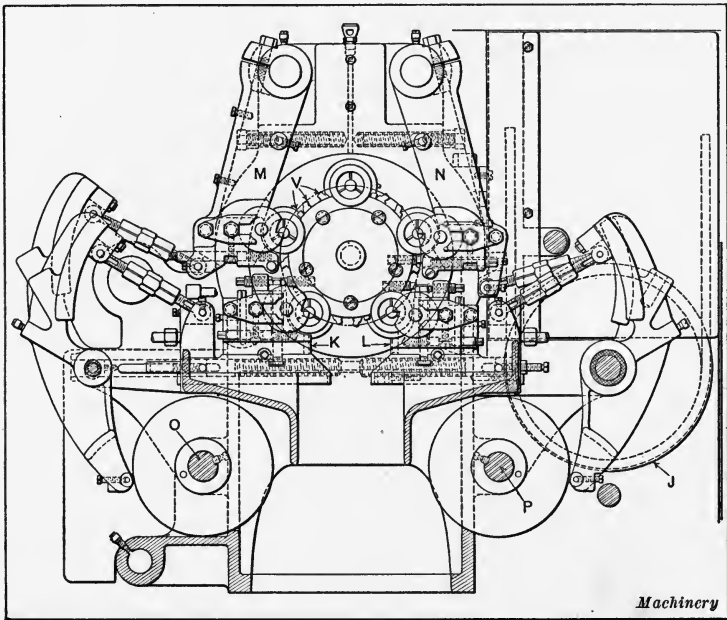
Cross-slides and Swinging Arms of Davenport Machine
